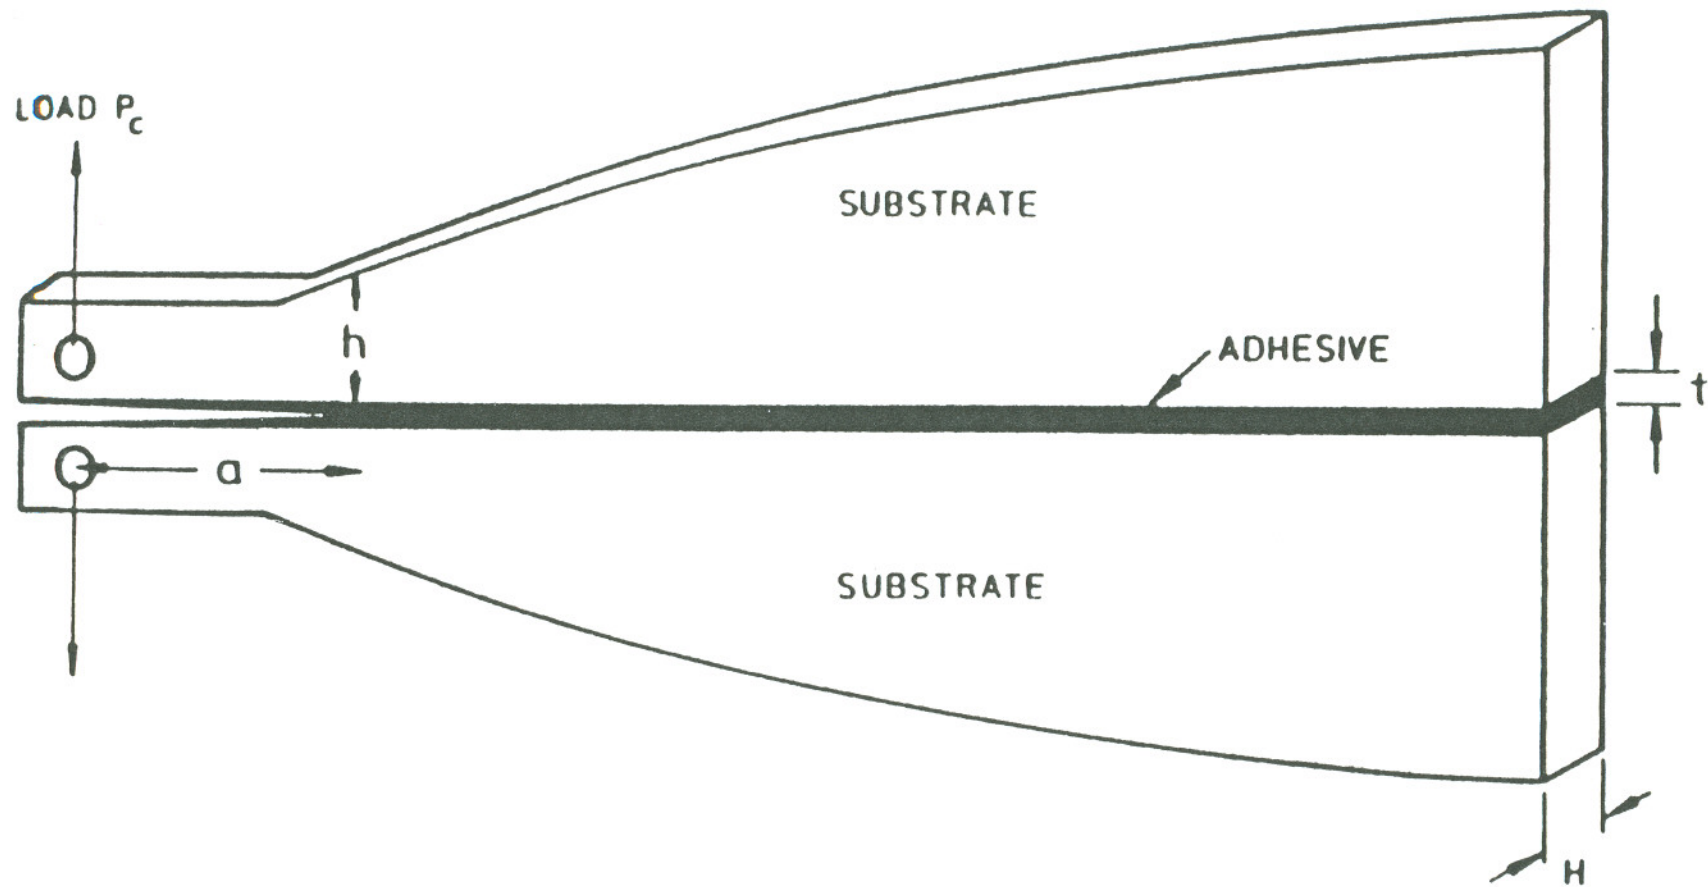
Contour-double-cantilever-beam adhesive joint specimen [63].
